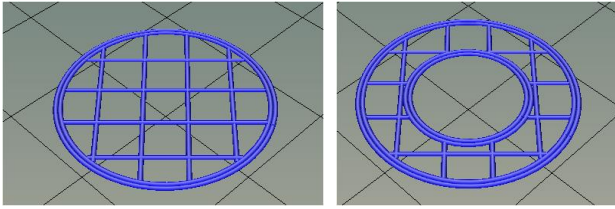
Intermediary layers for cylindrical 3D printed part [11]
